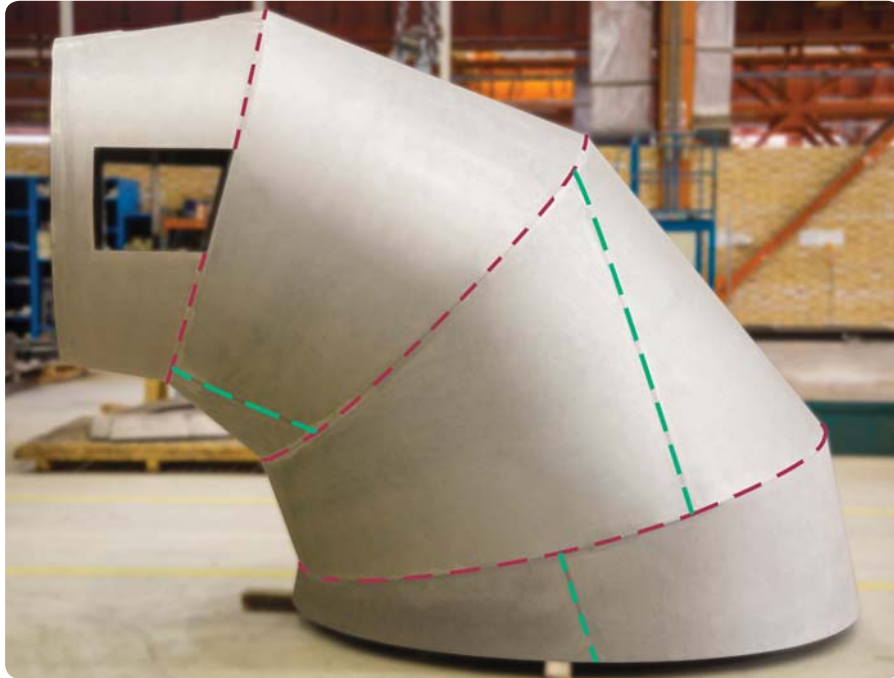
Mixing chamber casing longitudinal K-TIG welded joints (dashed green lines); circumferential joints to be welded at a later stage using K-TIG technology (dashed red lines)
